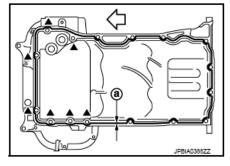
Identifying Lower Cylinder Block, Oil Pump And O-Rings Courtesy of NISSAN NORTH AMERICA, INC.
